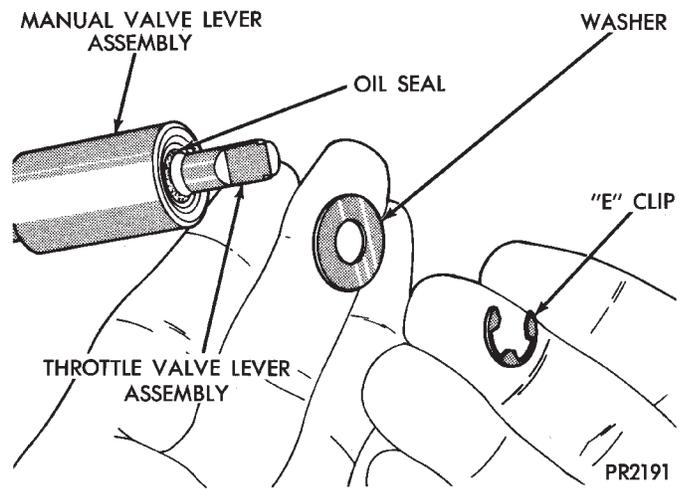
Throttle Shaft E-Clip, Washer, and Seal
